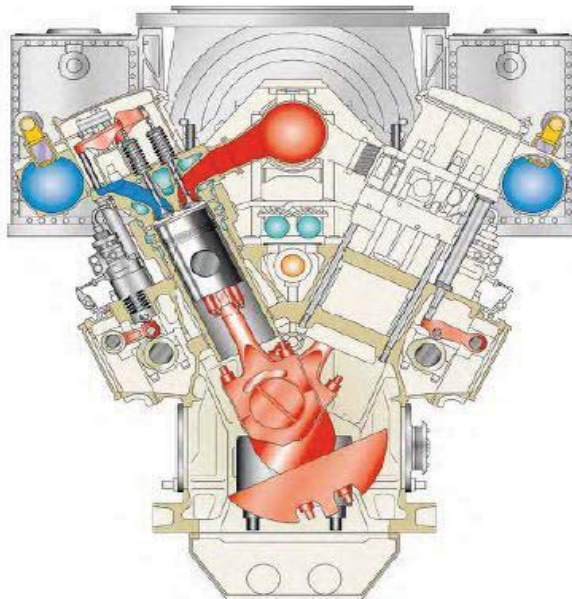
Cross-section of MAN Diesel 51/60DF medium-speed engine
